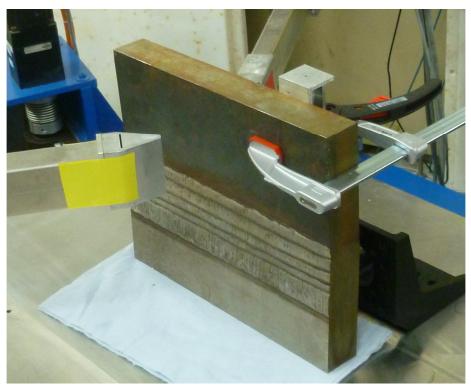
Section of Mock-up no. 3 on diffractometer at HB4 during measurements in the welding longitudinal direction; the width of the weld on the upper specimen surface is well visible.
